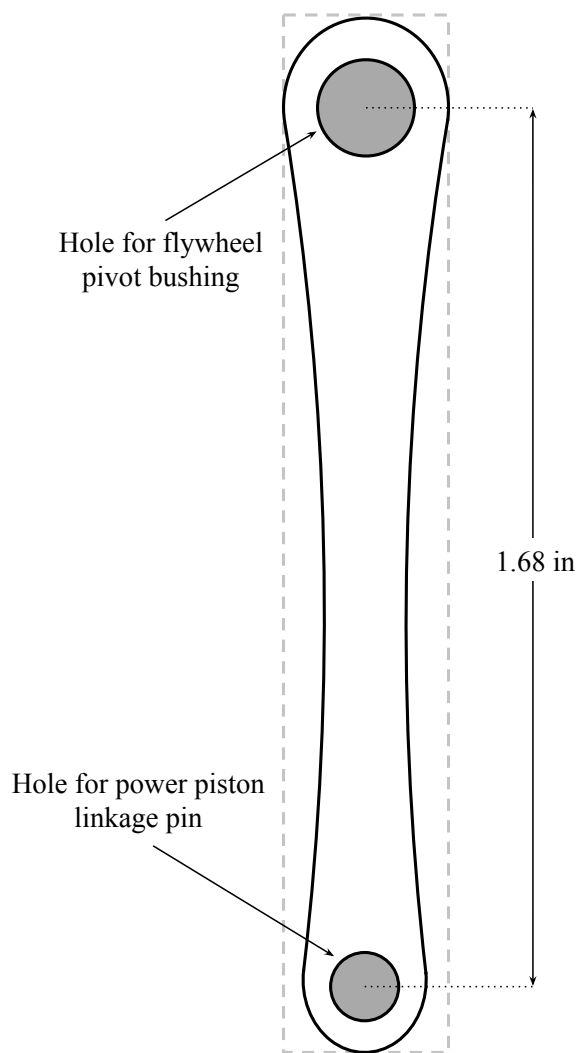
Diagram detailing the power piston connecting rod. The top hole fits around the bushing through which the flywheel mounting screw is inserted. The bottom hole fits around the power piston pivot pin forming a simple, low-friction joint. The dotted rectangle shows the size of the connecting rod after an initial rough cut from aluminum sheet; after the holes were drilled, the edges were rounded into the final dog-bone shape using an oscillating spindle sander.
